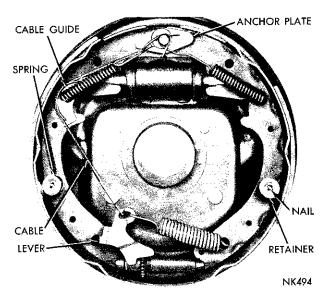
Removing Brake Shoe Retainer, Spring and Pins
